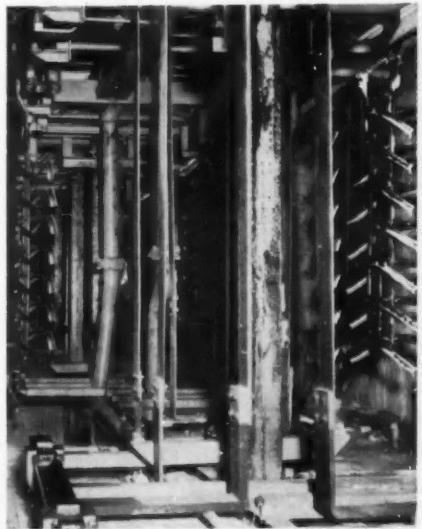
Portion of the conveyorized machine on which stainless steel windshield reveal moldings are moved through cleaning, rinsing and chrome plating tanks.
